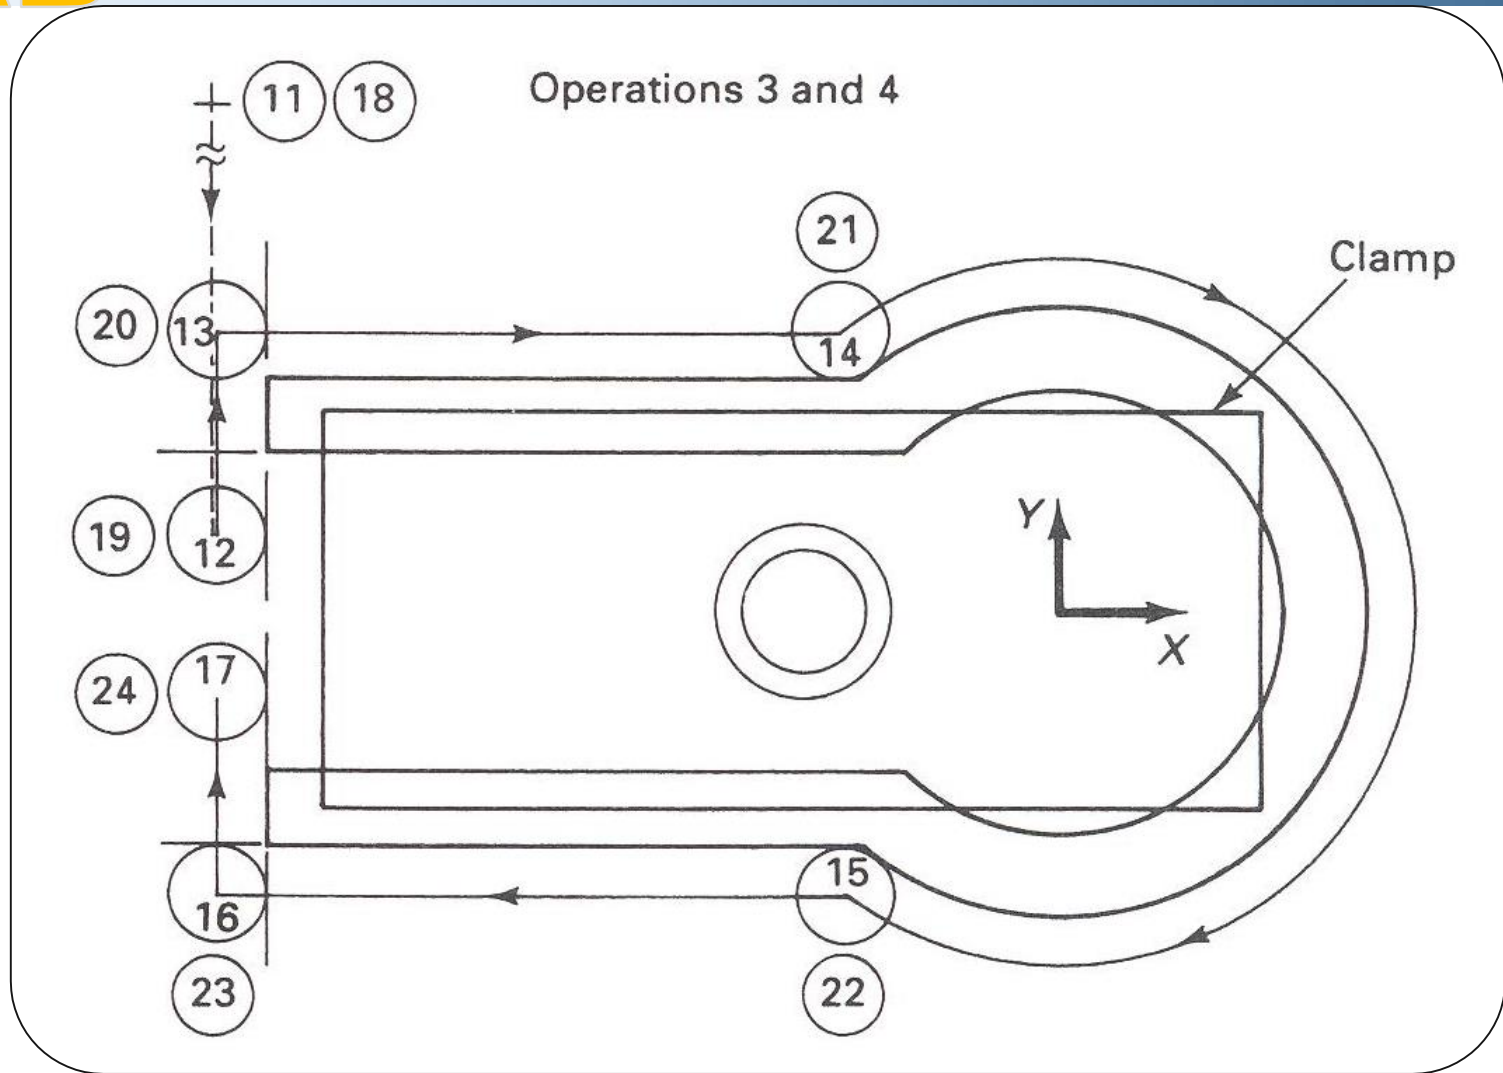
(b):Cutter path for milling the outside of the part the part of Fig. 6
